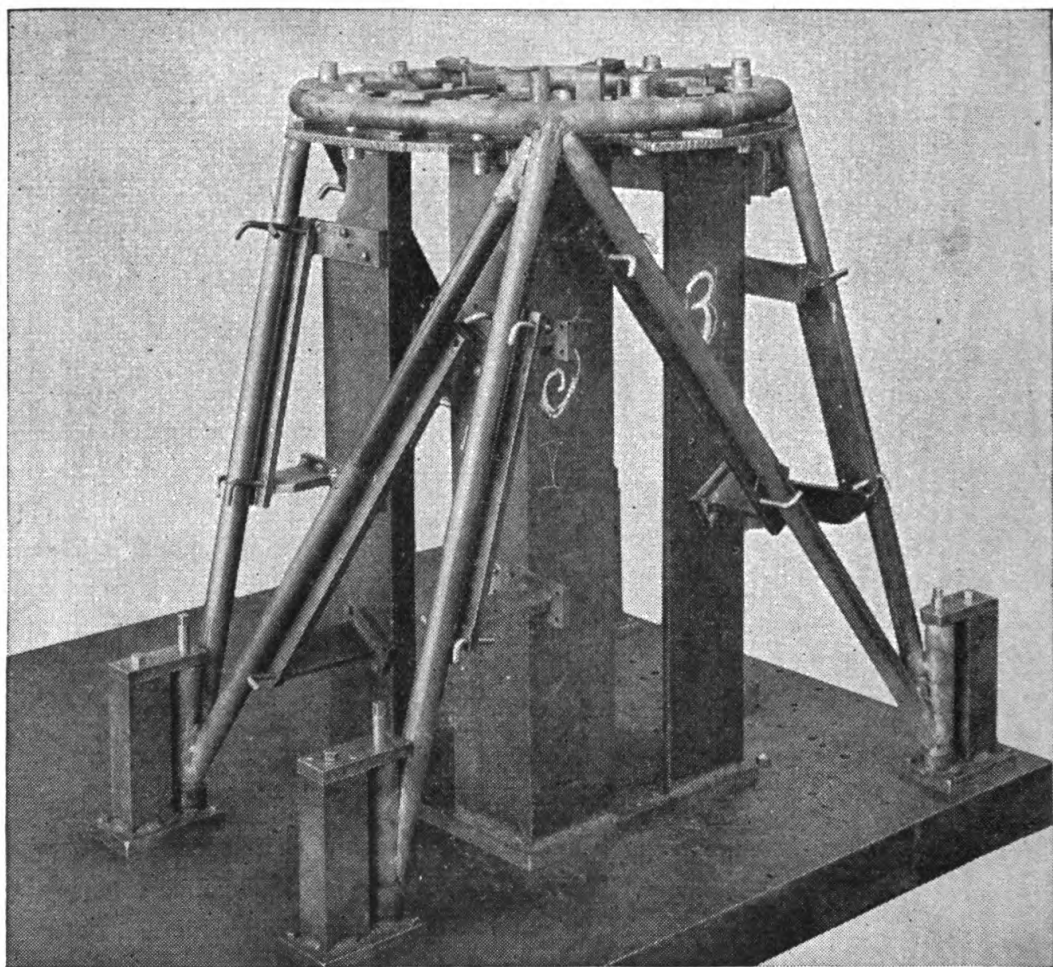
Welding jig used in construction of a steel tube engine mount.
